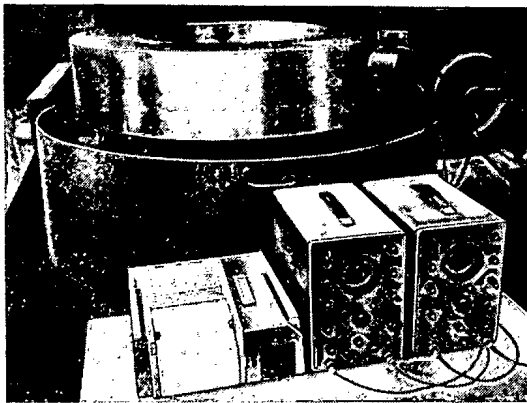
Automatic device for ultrasonic inspection of shells during the machining process.
